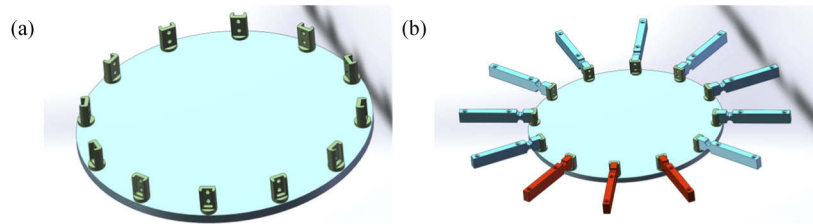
Mirror with loading rod: (a) bonding module and (b) load module.
